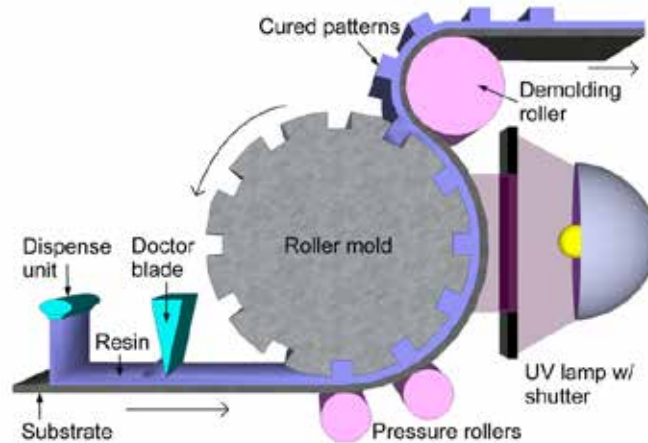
Schematic of a typical continuous UV roll-to-roll nanoimprinting setup with UV lamp exposure unit. A dispensing system is utilized to deposit a UV curable liquid resin either as a pattern of drops or as a continuous film (shown). Following deposition of the resin, a variety of thickness control measures can be employed, such as a doctor blade (shown). Multiple pressure rollers are often used to ensure uniform spreading of the resin and filling of the roller mould cavities prior to UV exposure. A demoulding roller is used to peel the cured patterns off the roller mould. There are many possible variations to this setup. However, this schematic shows some of the most commonly used elements.
